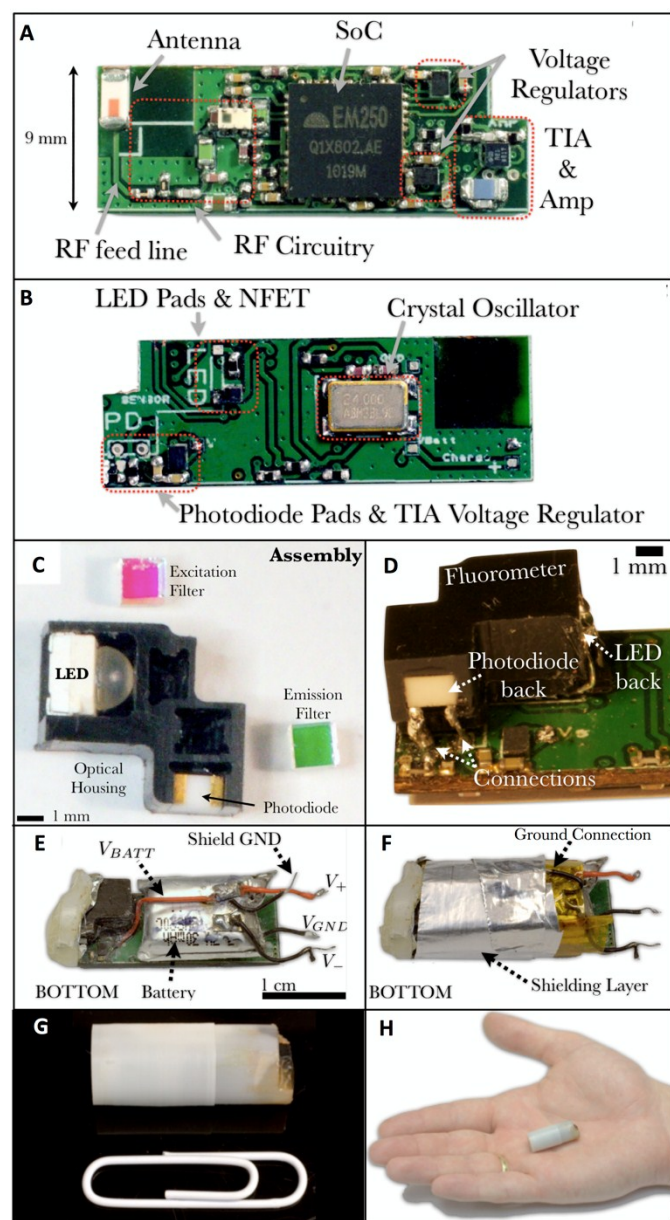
Photographs of the capsular fluorometer. (A-B) Top and bottom of the assembled 4-layer PCB that houses all electronic components. (C) Optical components and optical housing of the fluorometer. (D) Mounting of assembled optical sensor onto the PCB. (E) Complete device without encapsulation. (F) Device with electromagnetic shielding. Encapsulated fluorometer pictured next to a standard paperclip (G) and in the palm of a hand (H).
